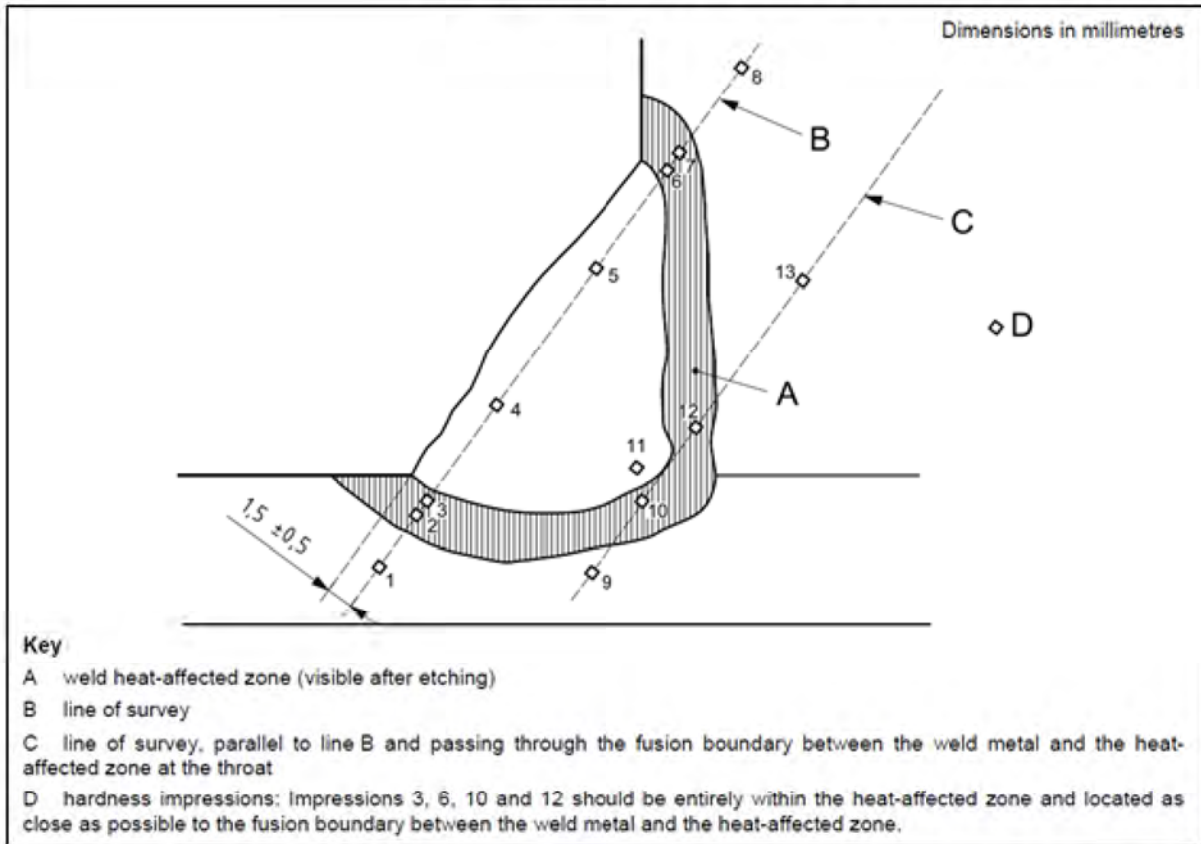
Hardness Indent Locations for a Branch Groove or Fillet Welding Procedure Qualification
